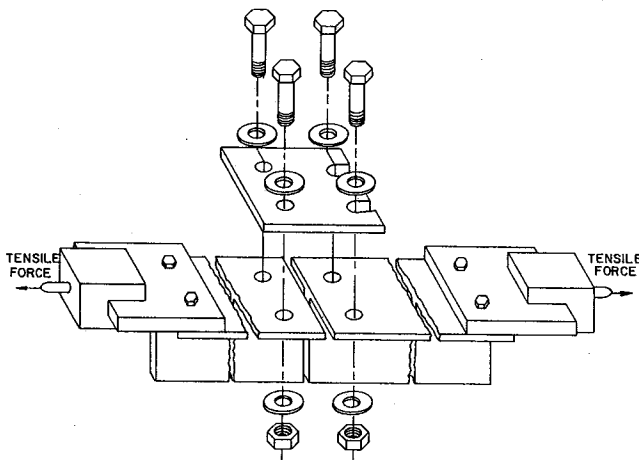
Test fixture for tensile test of slotted steel fuse plate.
